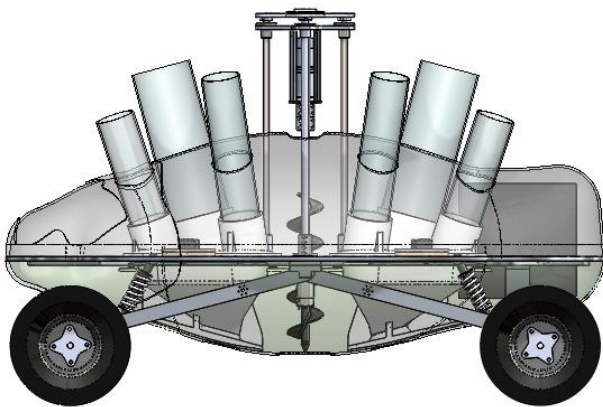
The vacuum-formed shell of BloomBot rises and falls to be a compact container for the parts within.
